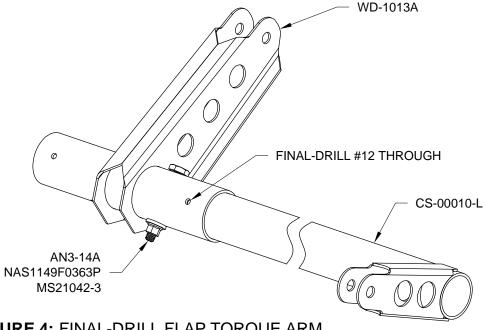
FINAL-DRILL FLAP TORQUE ARM
